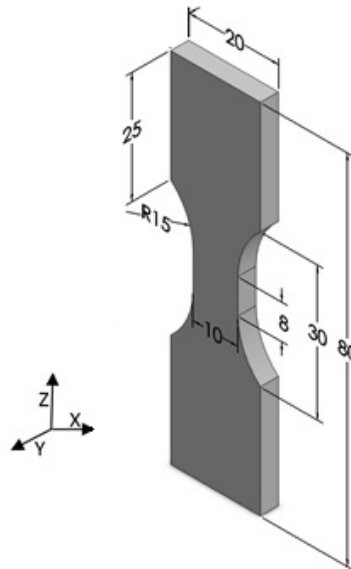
Dimensions of the test specimens (all dimensions in mm)
